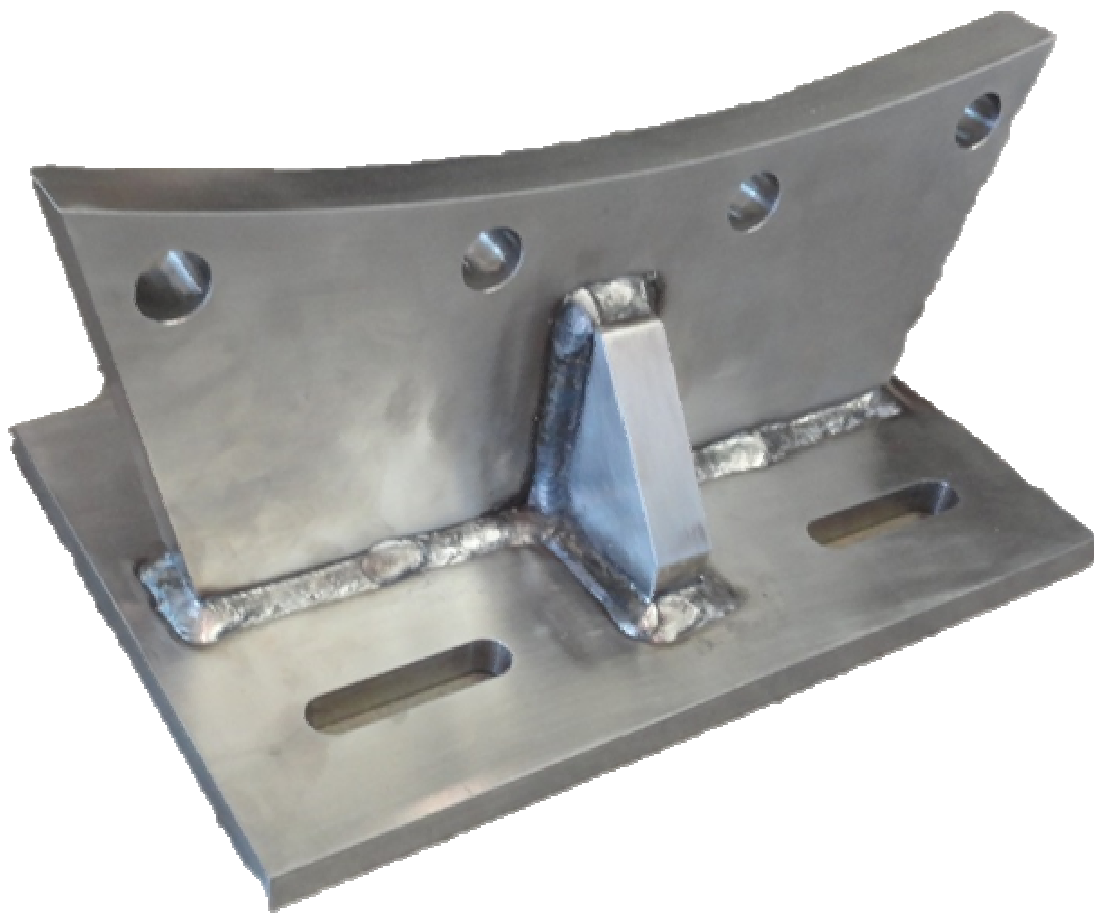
The engine bracket assembly is to be welded together per instructions denoted in sub-assembly drawing 2003C. Slots allow for left-right alignment of engine.
